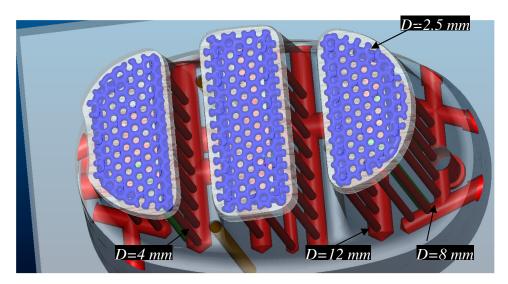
Surface cooling channels and diameters of the cutlery drainer insert
